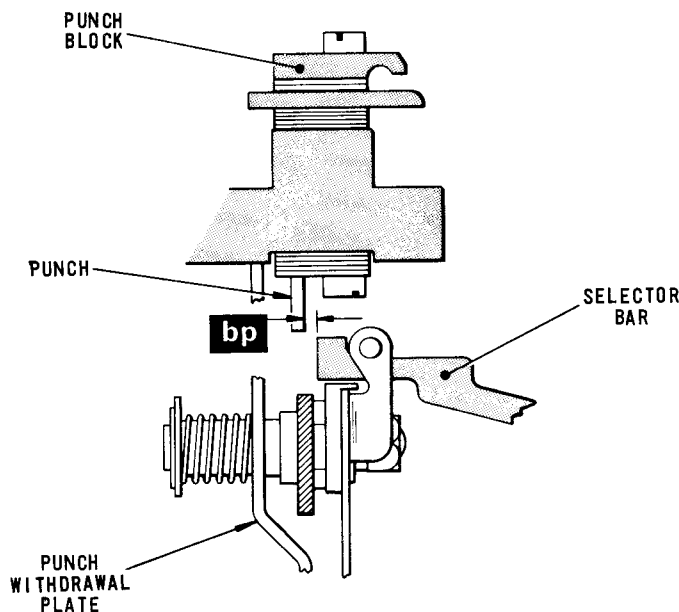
SELECTOR BAR/PUNCH MECHANISM
